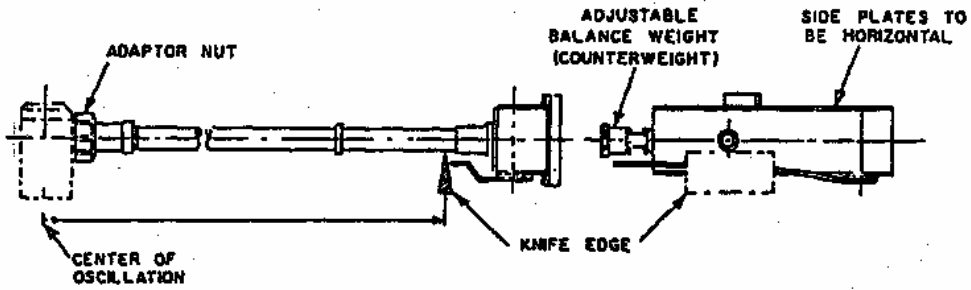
Pendulum Assembly Showing Location of the Point of Balance
